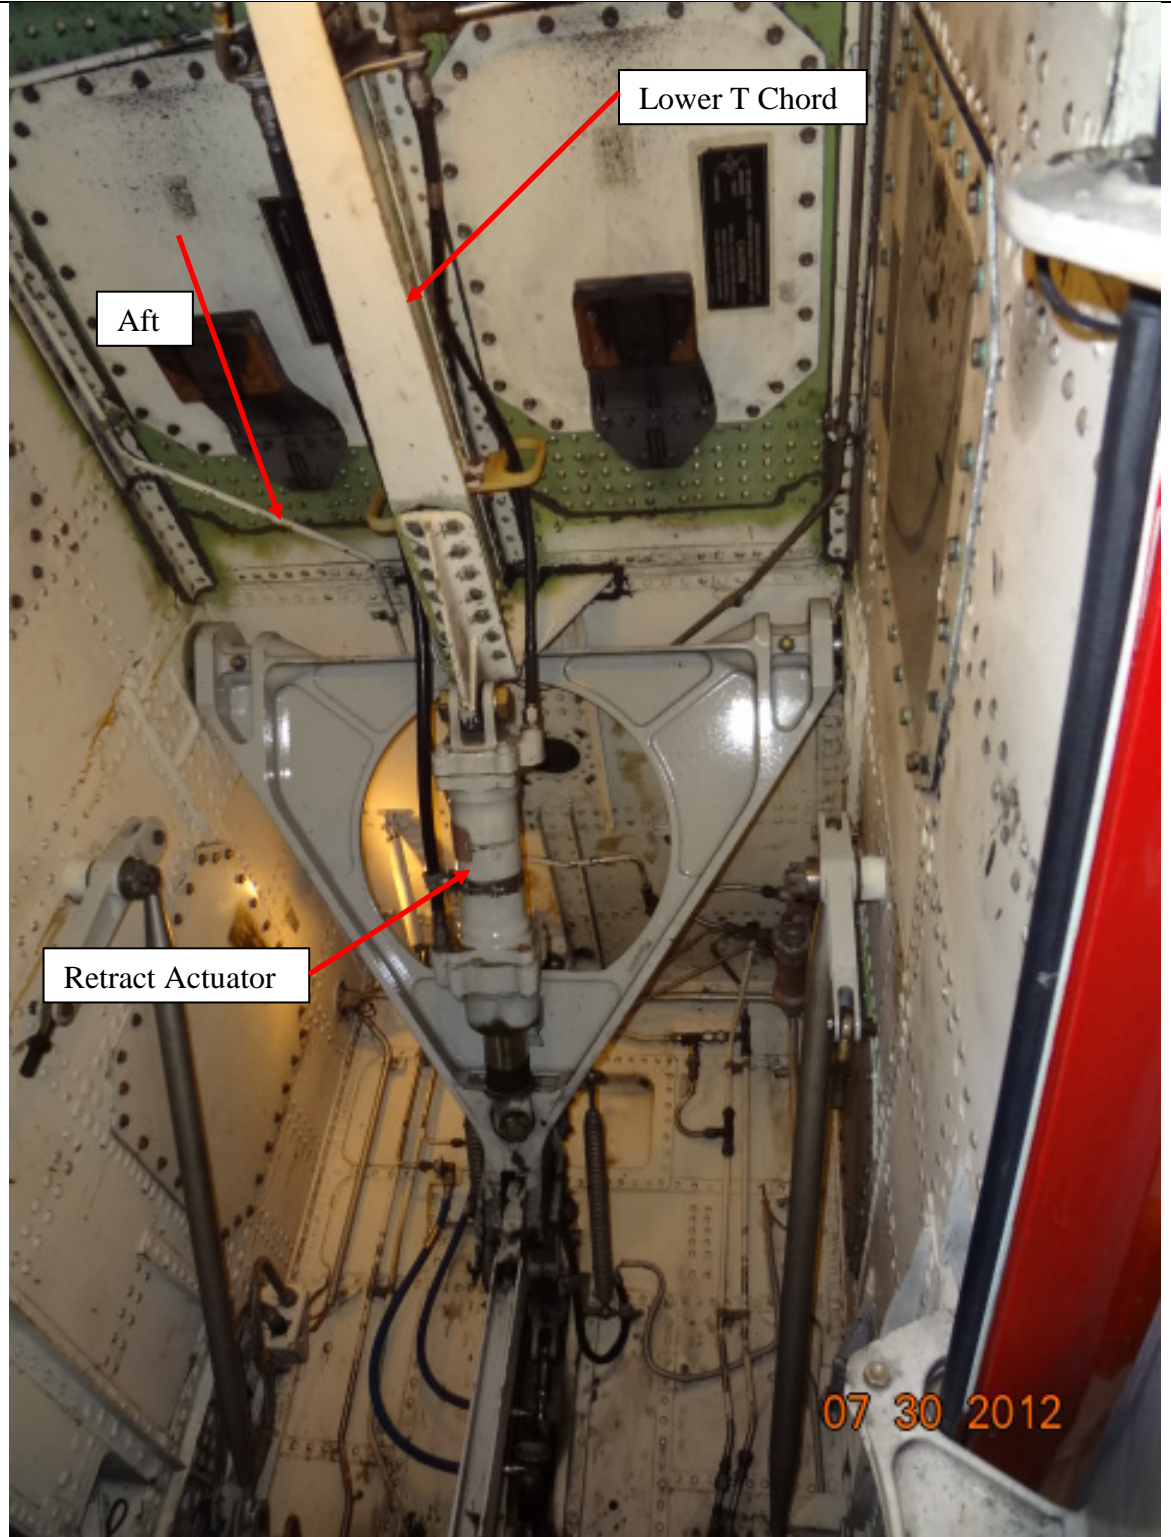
Undamaged retract actuator beam lower T chord viewed looking aft
